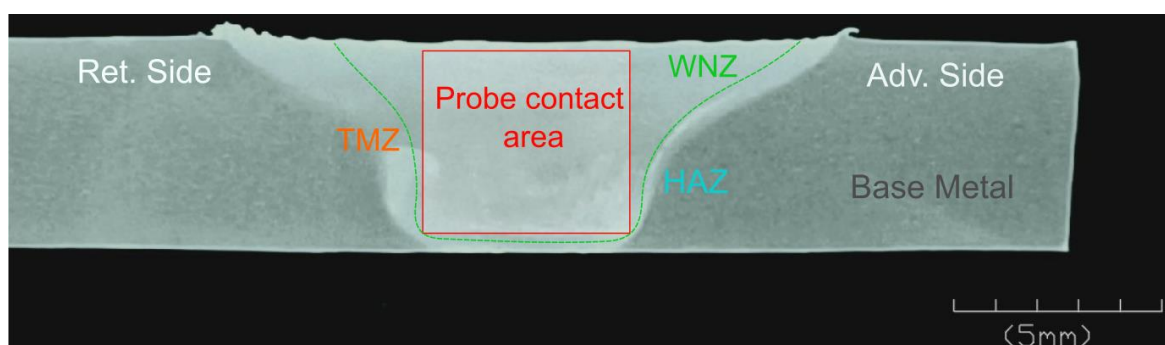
Macrograph of FSWed joint cross-section with three weld regions
